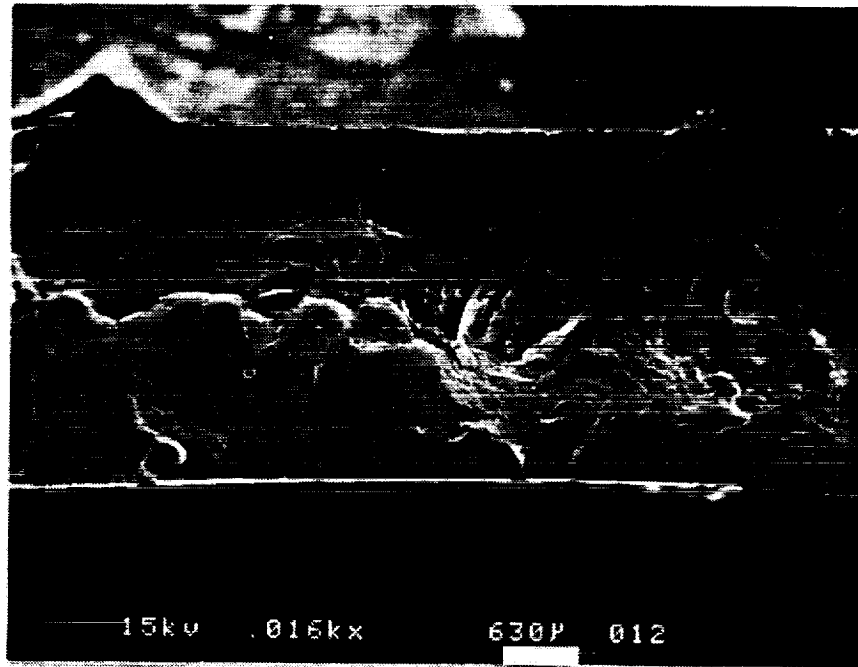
Scanning Electron Micrographs of Fracture Surface of Partial Penetration Welds of 2095-T8 After Tensile Testing.
